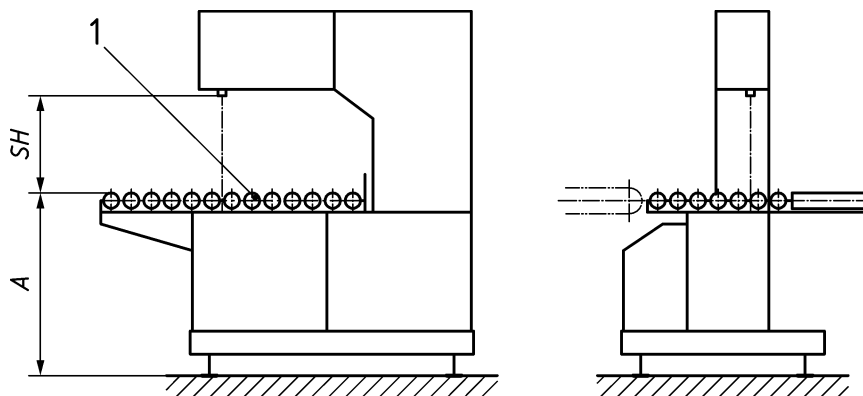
Band saw machine type C with sliding feed table and protective rail
